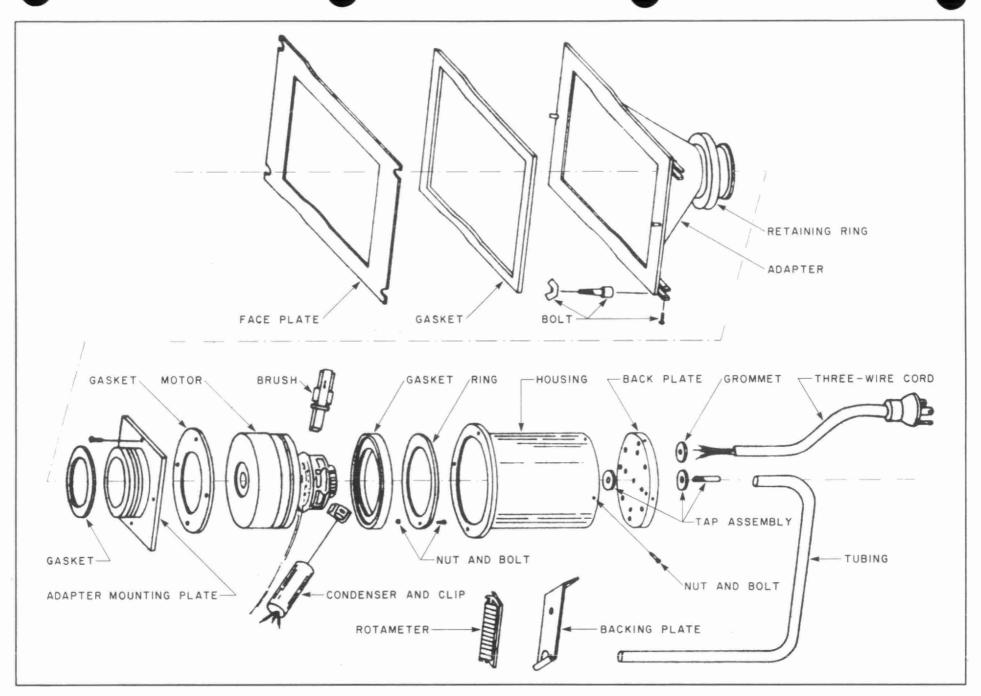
FIGURE I - EXPLODED VIEW OF TYPICAL HI-VOLUME SAMPLER PARTS (8.4)
